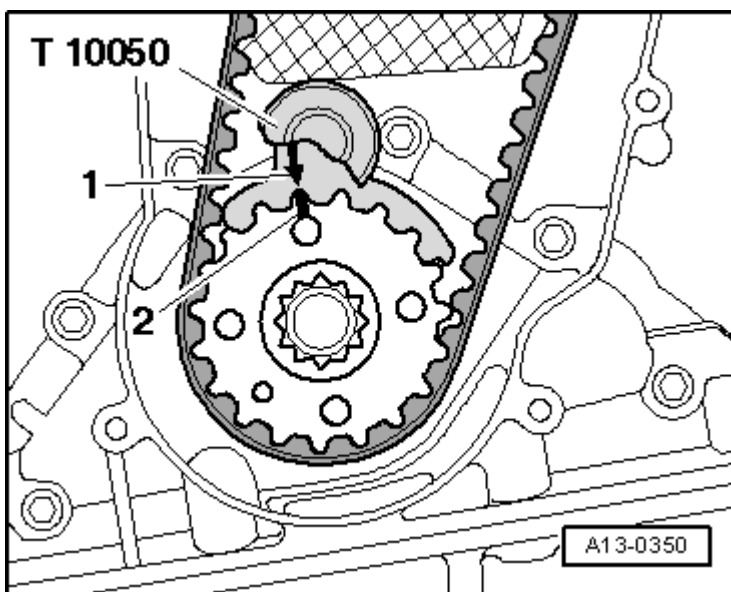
Identifying Crankshaft Toothed Belt Pulley And Crankshaft Stop T10050
